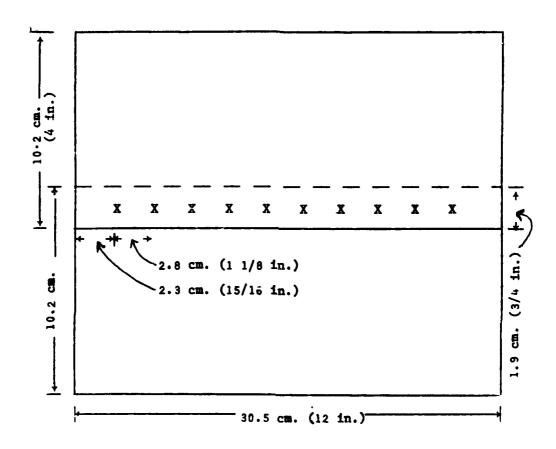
Resistance Spot-Welded Panels, Galvanized Steel
